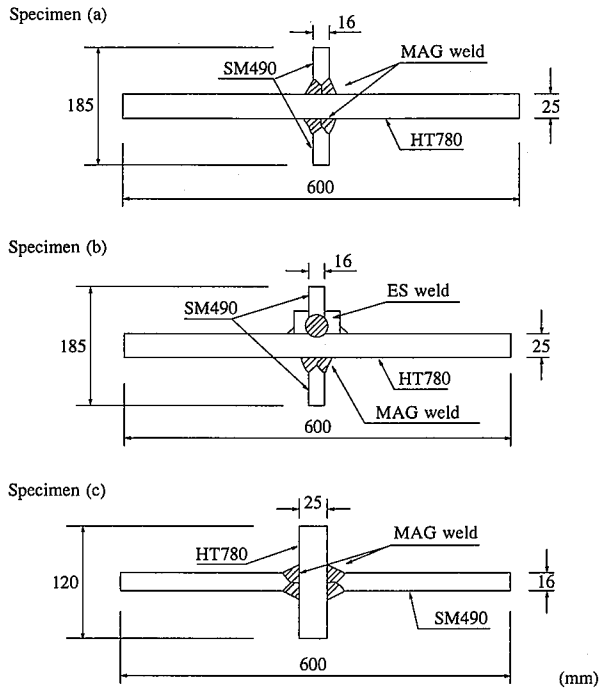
Weld joint specimens used in fatigue strength test
